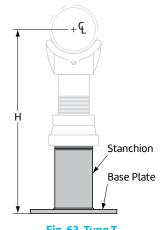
, Type T Square Cut Threaded End for use with Figure 264 or 265 Adjustable Pipe Saddle Support
